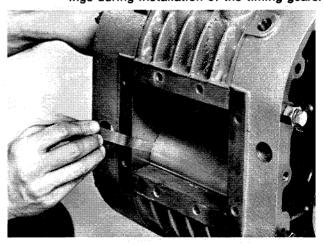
CHECKING DRIVE END CLEARANCE WITH FEELER GAGE
